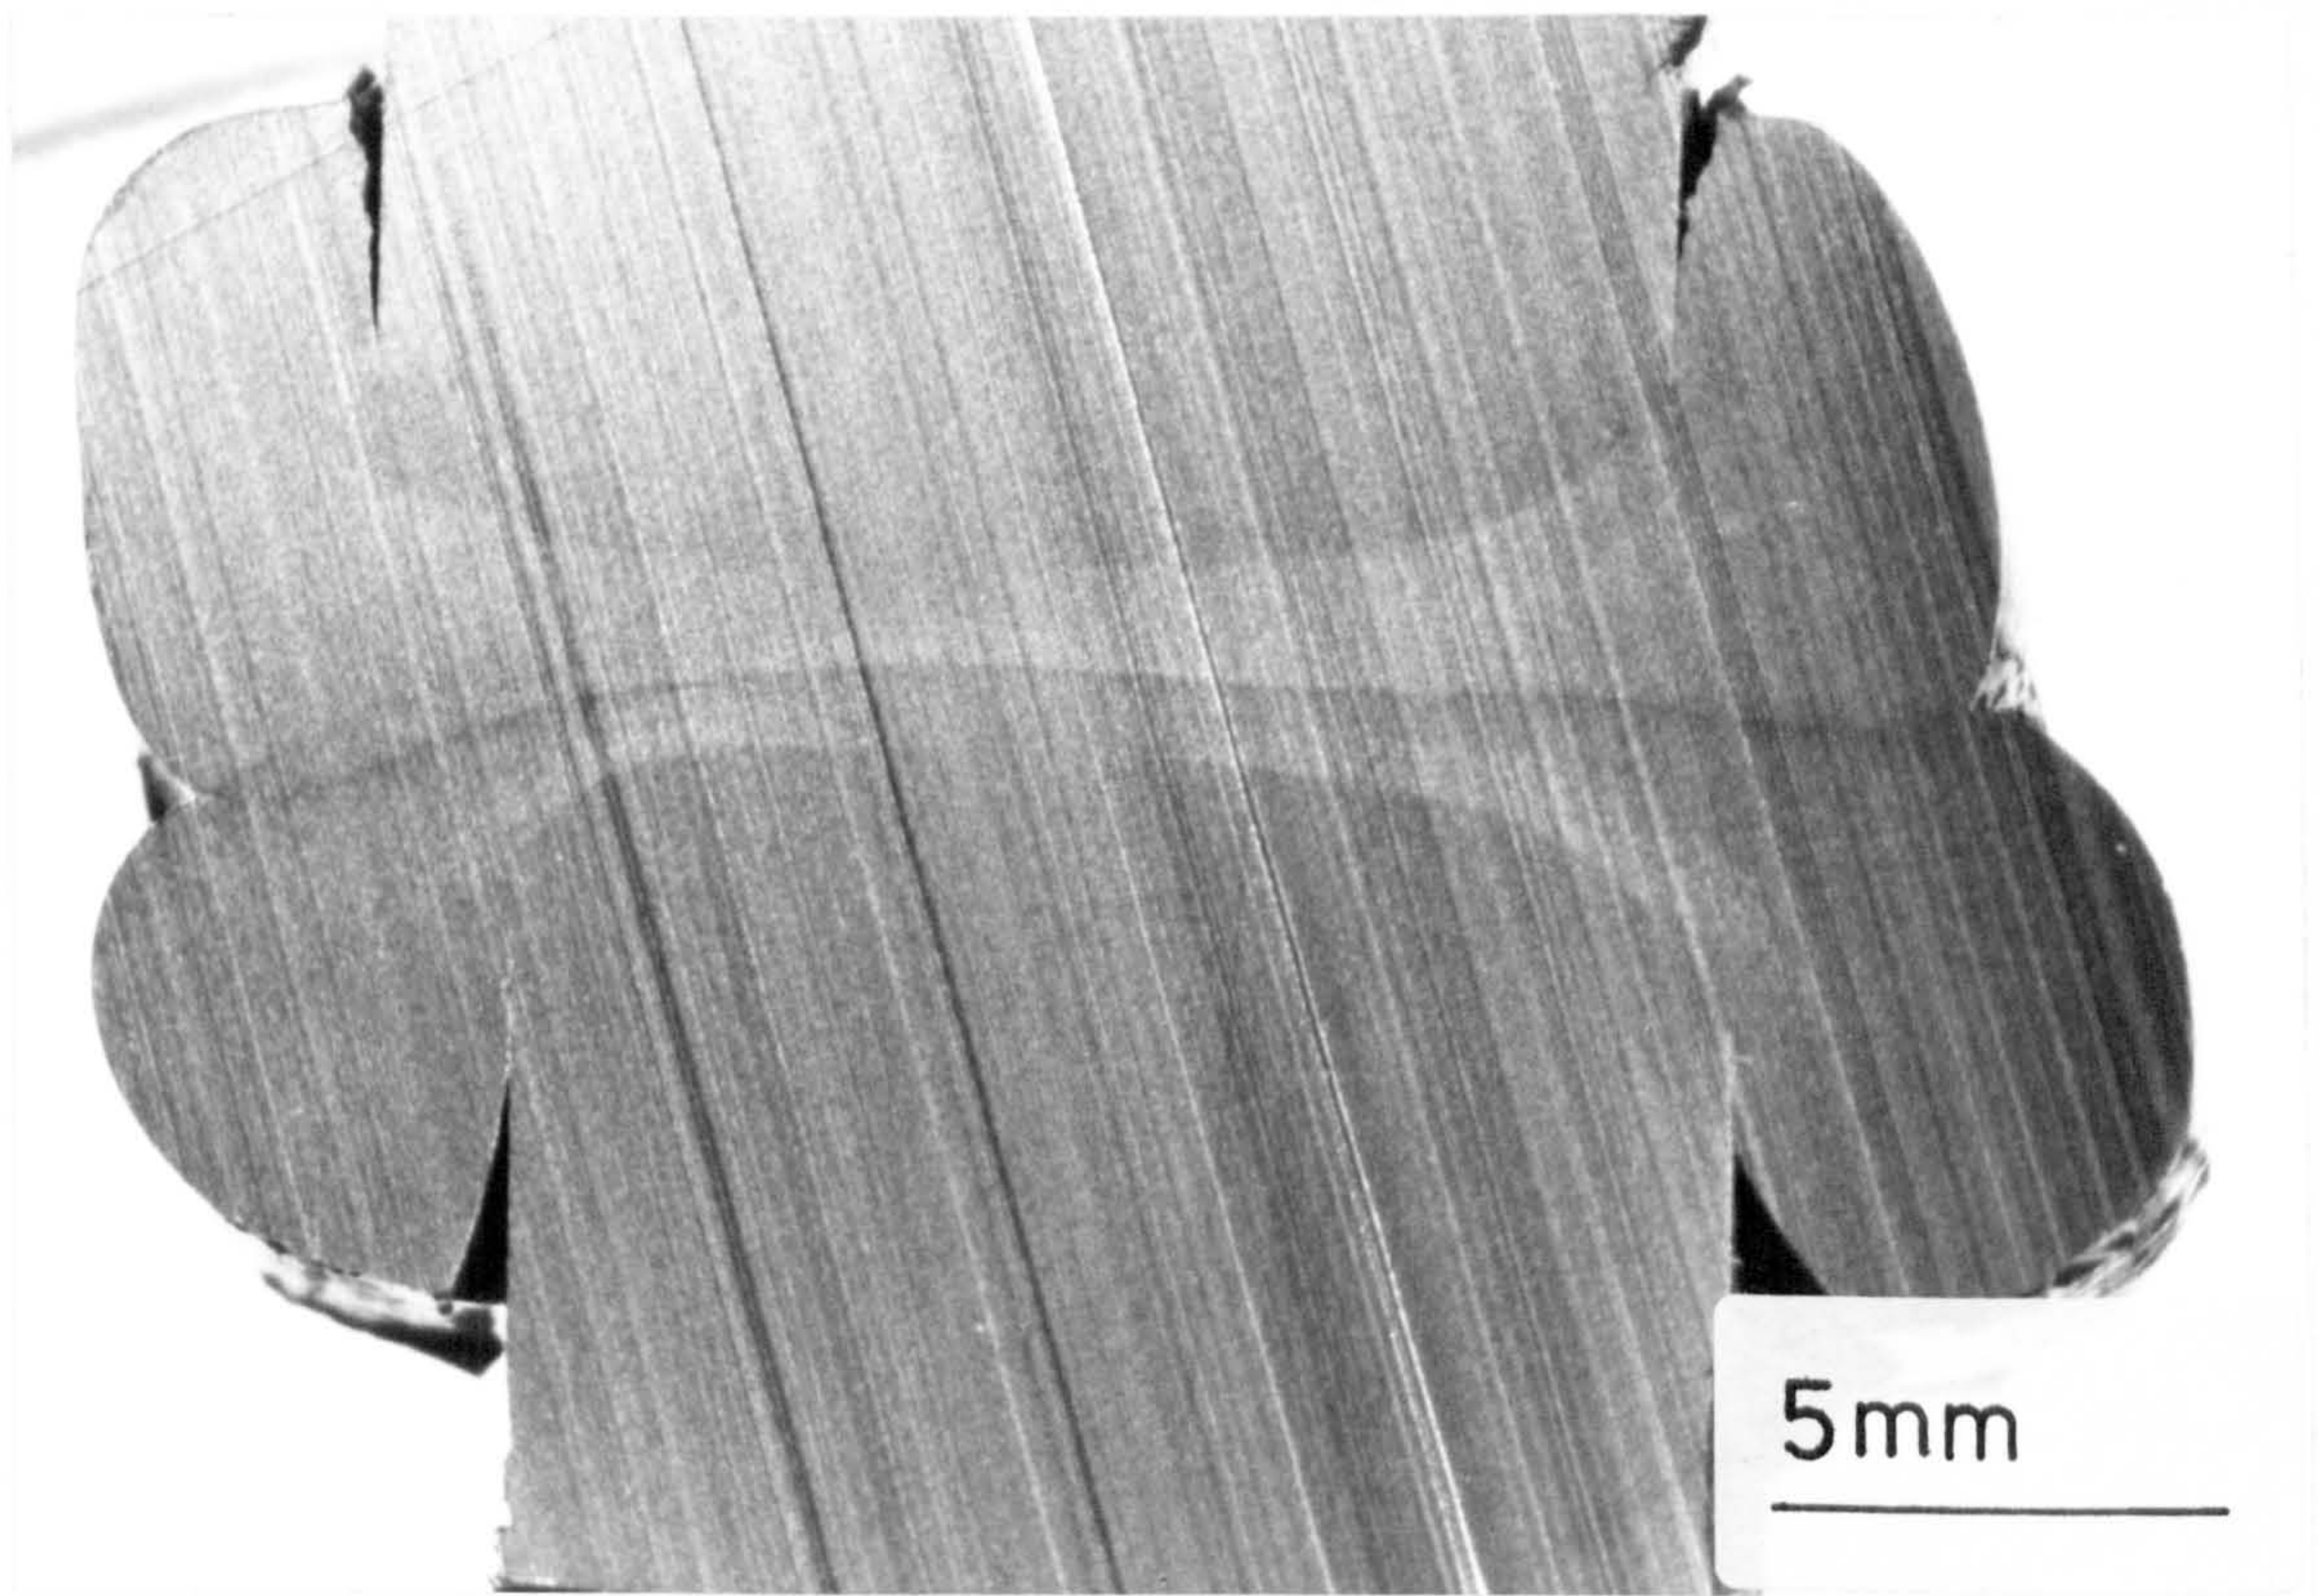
Surface of an HDPE butt-weld produced by removing a thin section of less than $10\ \mu\text{m}$.
